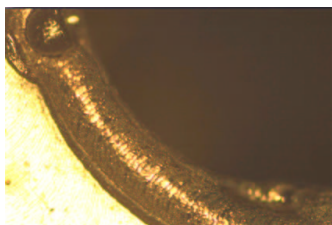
Bad welding seam with a hole and a gap.
